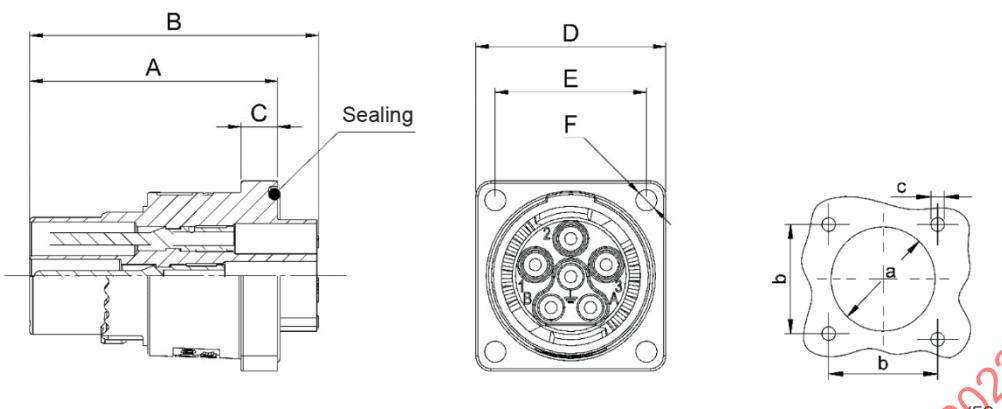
Fixed connector, male contacts, with a square flange front mounting
